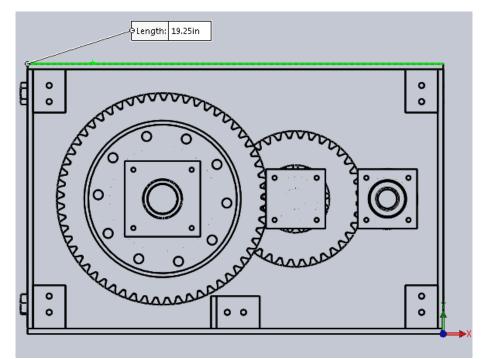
Length of 19.25 to allow for roughly an inch of clearance on either side of the gears.
